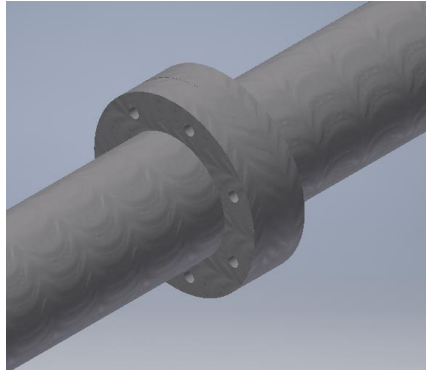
Shaft Mid Center having Flange Feature - Illustration
